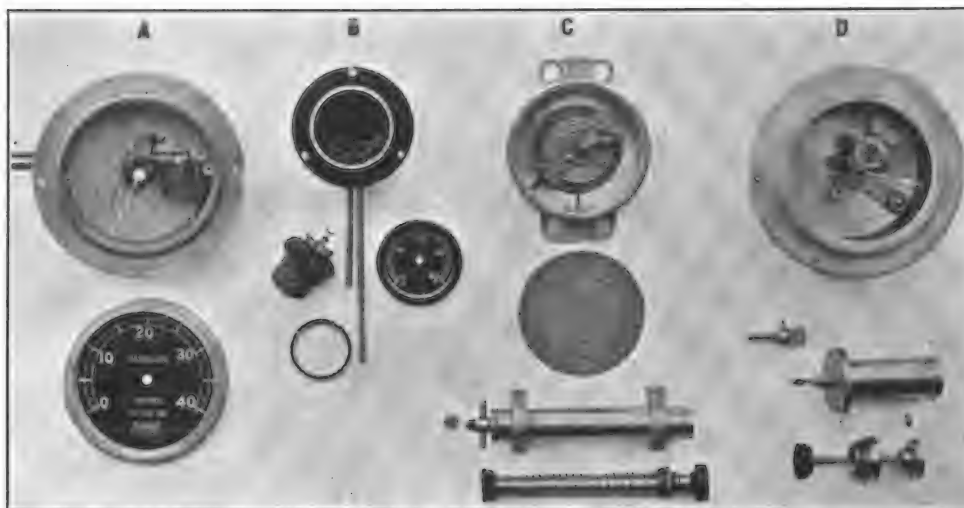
Pressure Type Gasoline Depth Gages —Disassembled.
